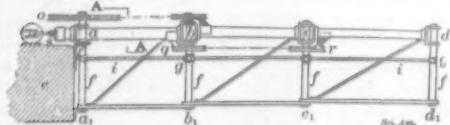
Side Elevation of the Extended Left Wing of the Machine.
